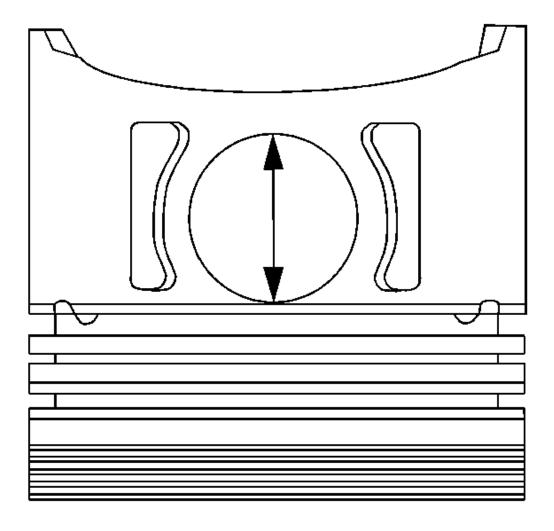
Using Inside Micrometer & Measuring Piston Pin Bore Courtesy of GENERAL MOTORS CORP.
